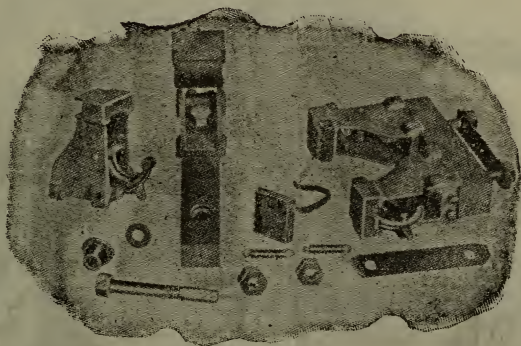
BUCKER BRUSH HOLDERS AND DETAILS.
